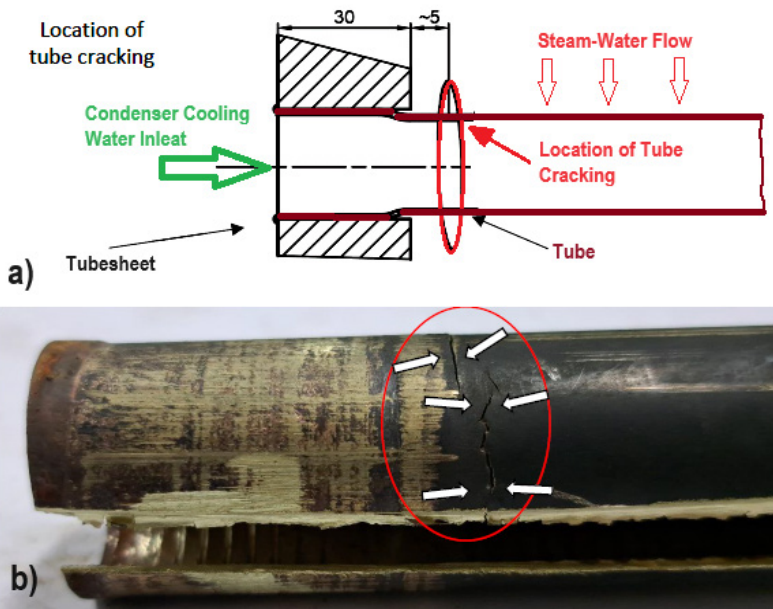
a): Location of tube cracking and b) Crack on the front end of the tube, approximately 5 mm after the tube sheet
